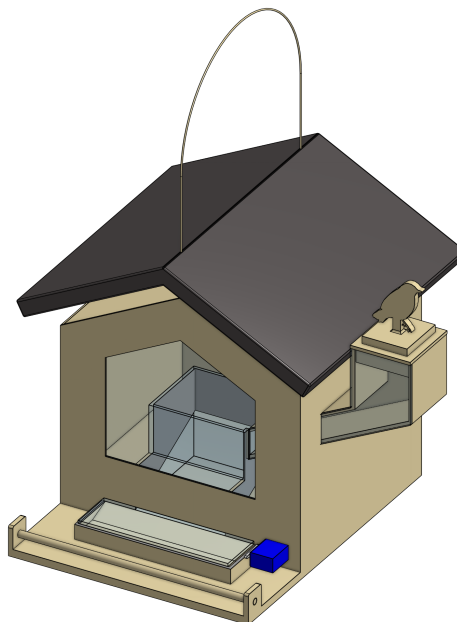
Final bird feeder CAD mechanical design (Onshape)
